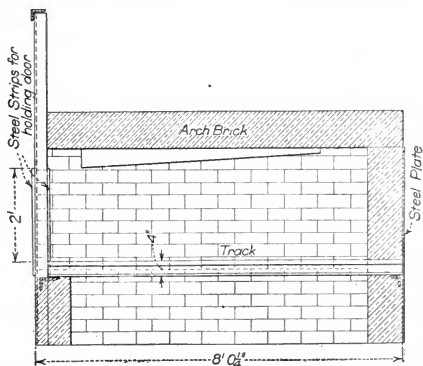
SIDE ELEVATION OF SINGLE-DRUM COKE BURNING FURNACE
